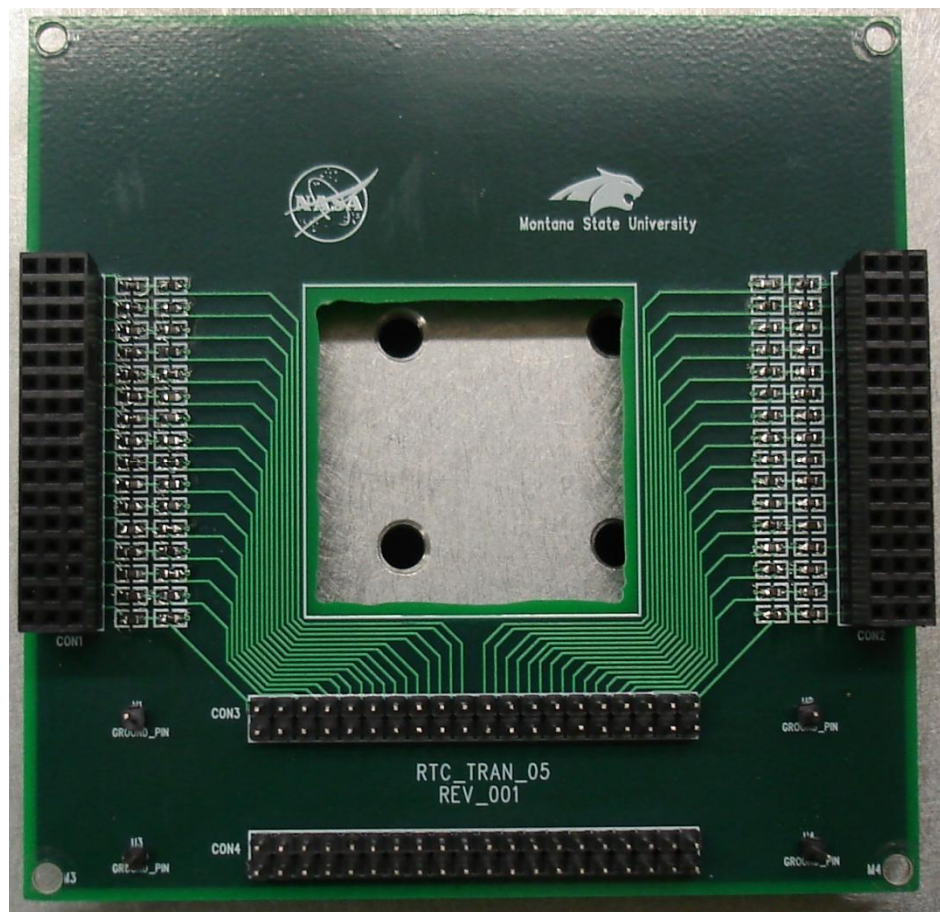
Picture of the loaded voltage translator board created on a 4 inch by 4 inch PCB.
